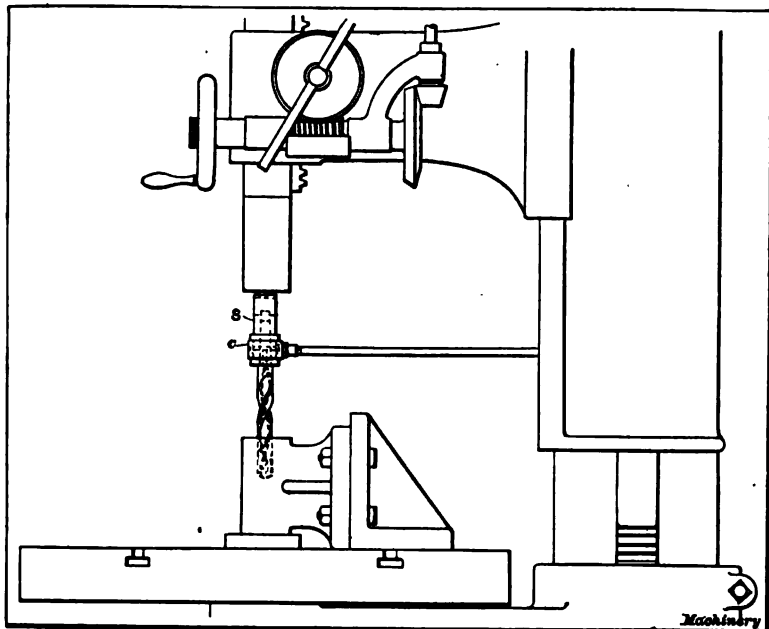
Method of Applying Oil-tube Drill to Drill-press
